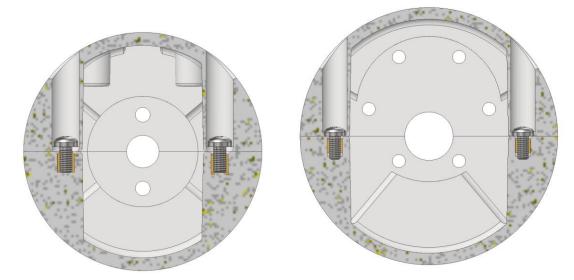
Cross-sectional view through mounting bosses on option A (top) and option B (bottom) handles
